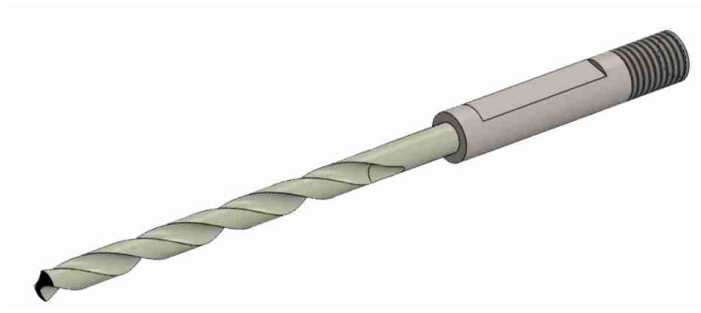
Drawing of the *David Richards Engineering* and *Element Six* drill bit made of tungsten carbide (SolidWorks). The threaded shank is made of steel and enables an easy grip to exchange the drill bit.
